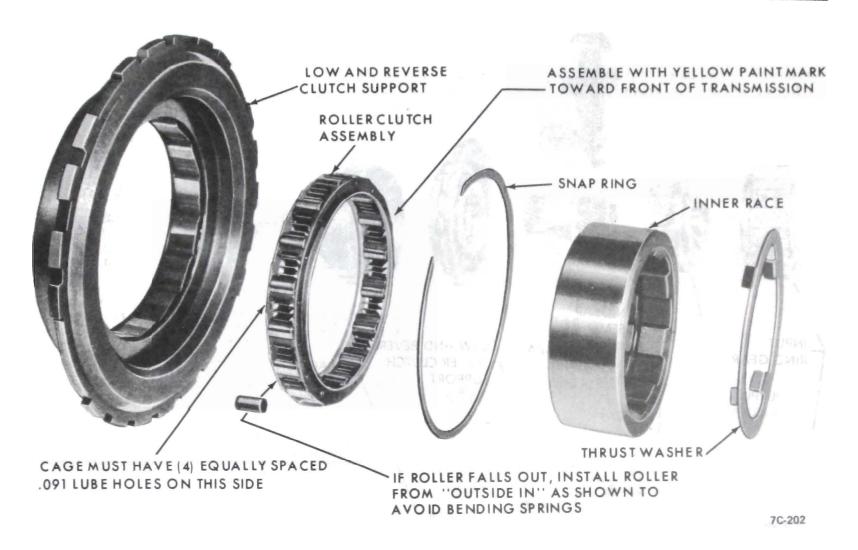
C-202 - Low and Reverse Clutch Support and Overrun Roller Clutch Assembly - Exploded View
